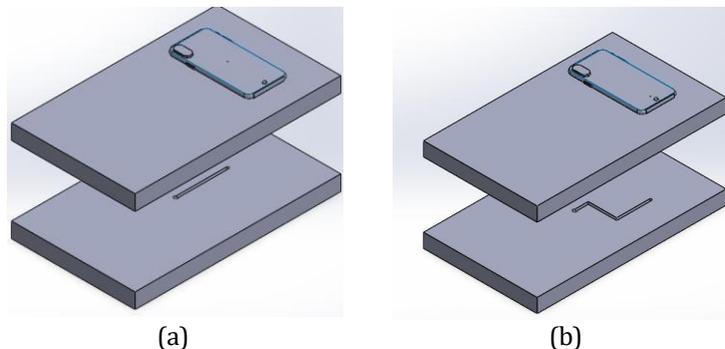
(a) Cavity for Layout 1, (b) Cavity for Layout 2
